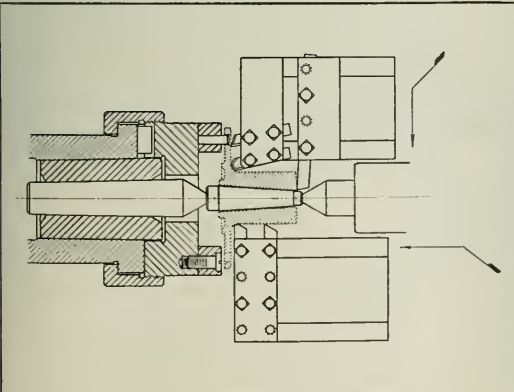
Rough-turning and rough-facing the Rear Hub in a Fay Automatic Lathe while mounted on a Taper Arbor
